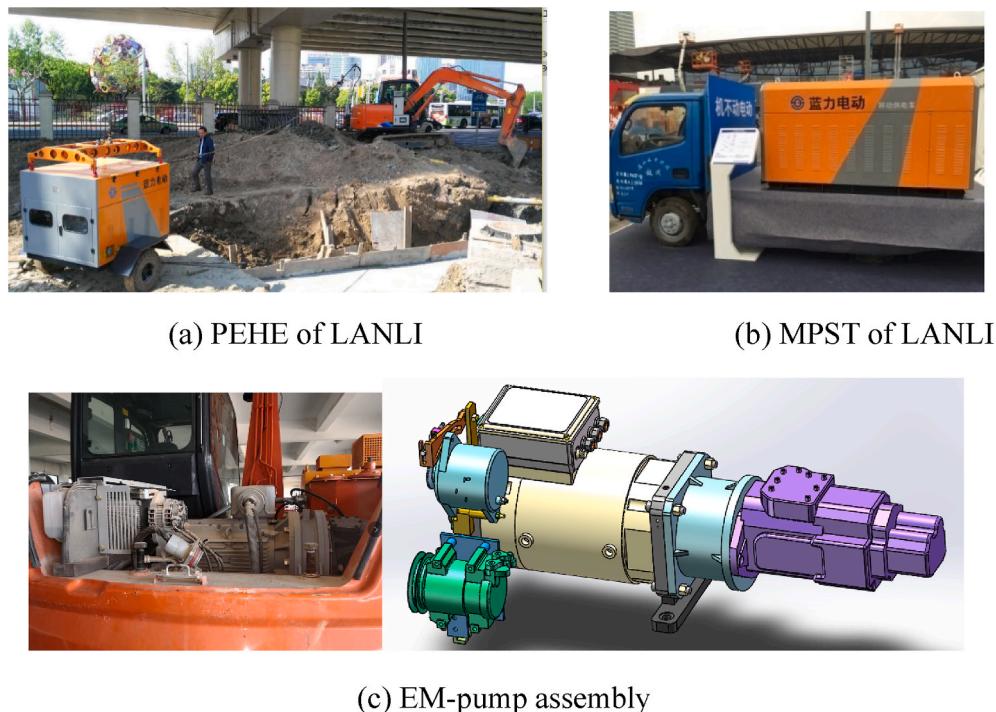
Electric excavator retrofit scheme of Hangzhou LANLI Electric Technology Co., Ltd.
